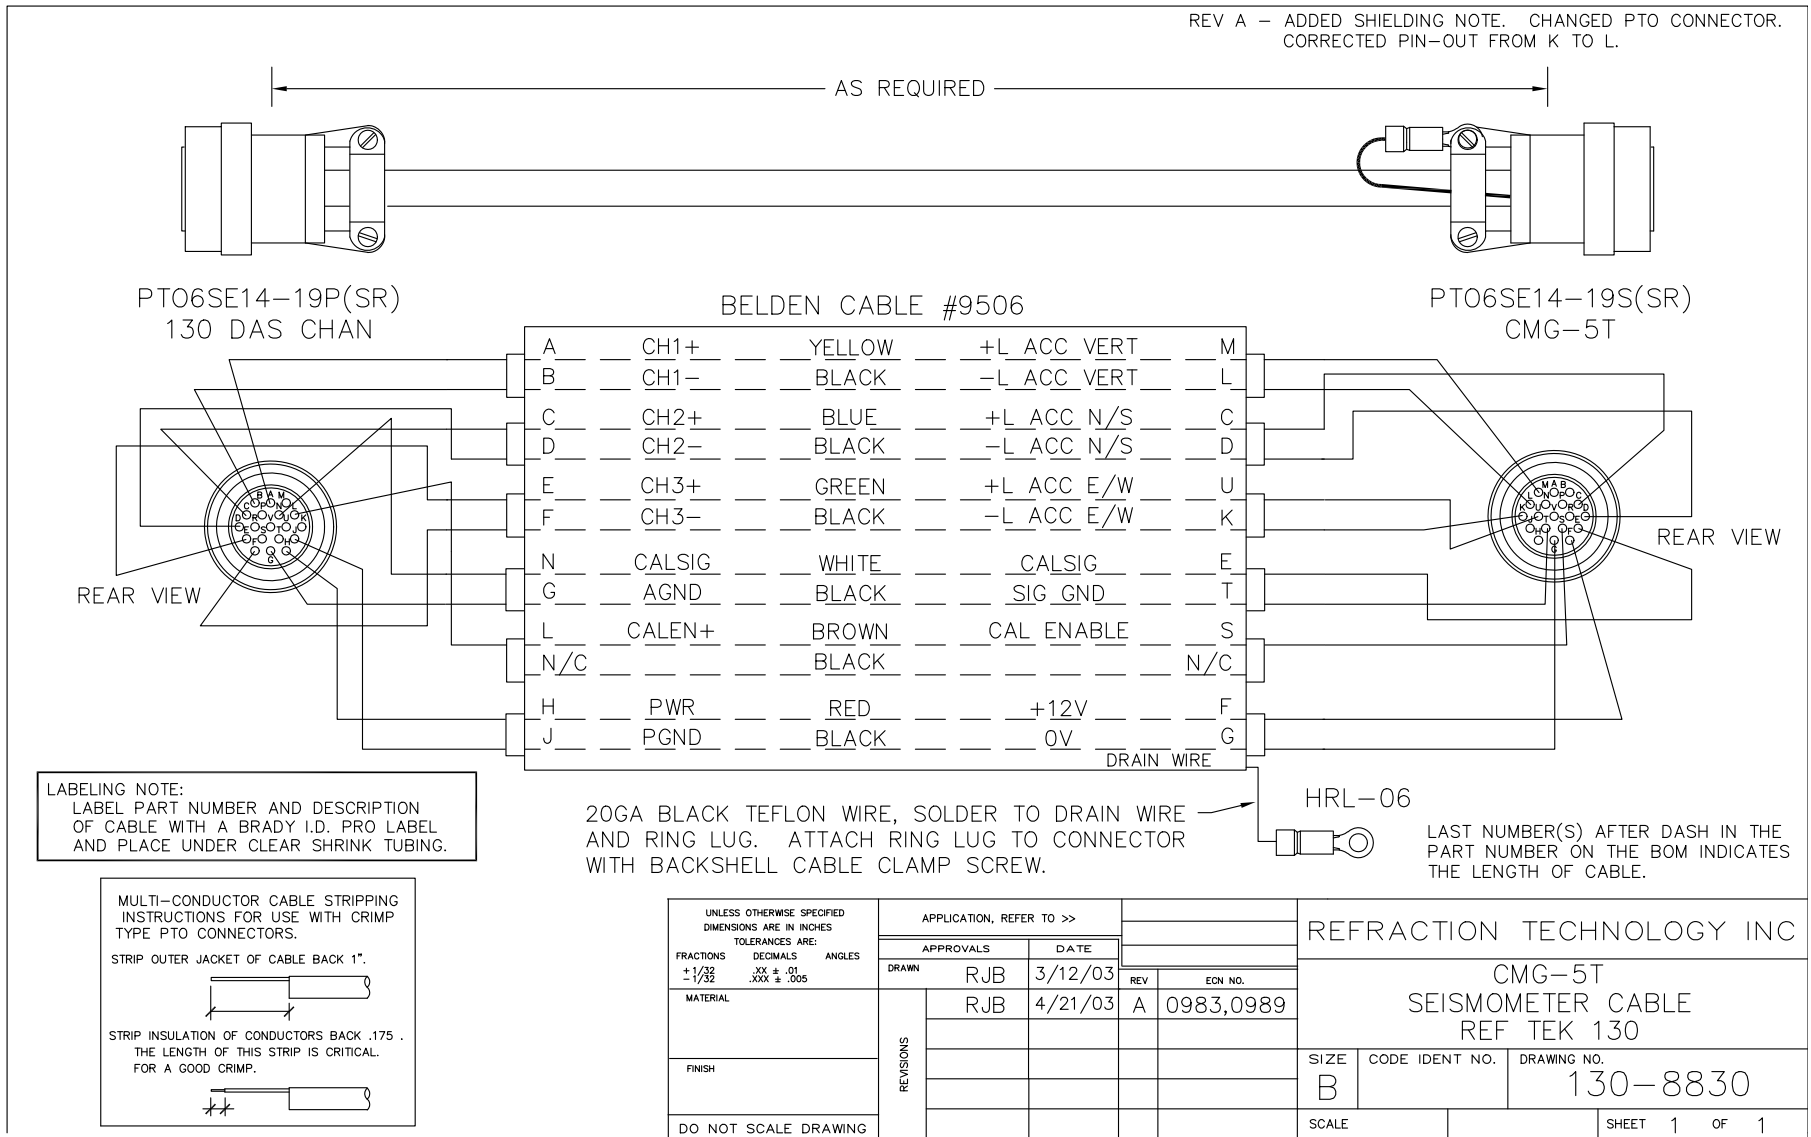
28 130-8830 - CMG-5T Seismometer Cable
